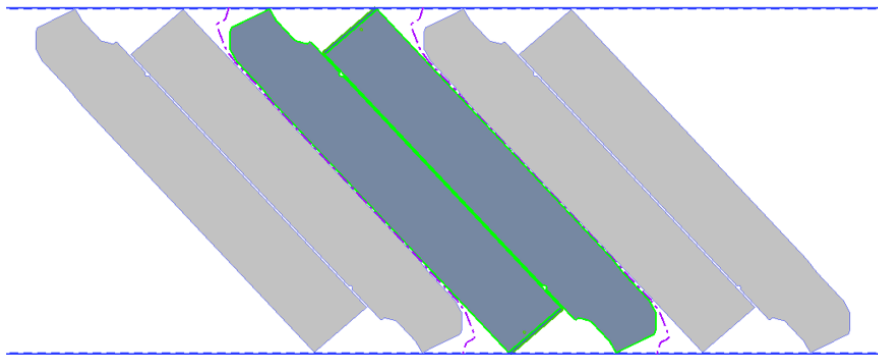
Part disposition on the blank, with the necessary rotation to fit in the steel sheet
